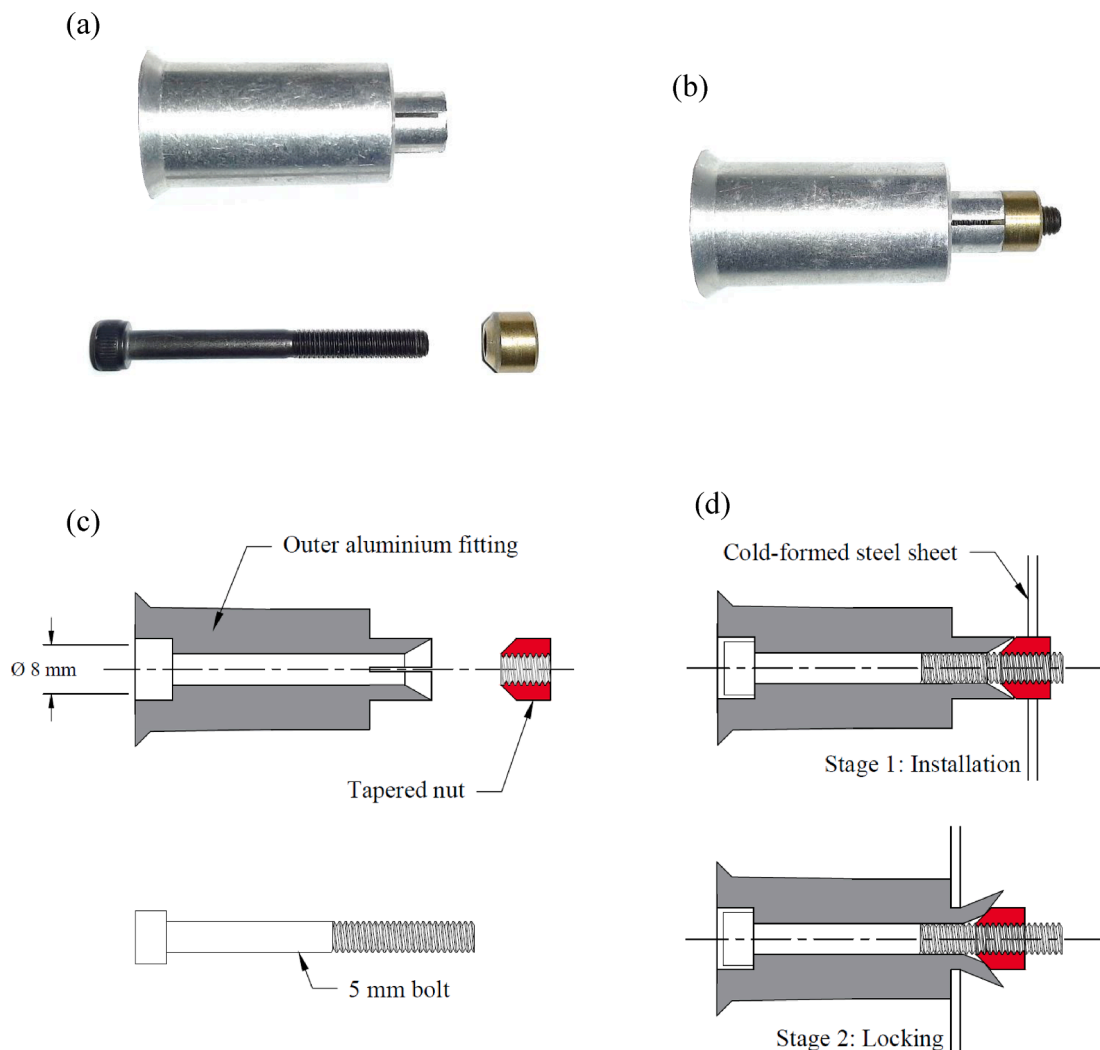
Type 4 connector: (a) Dismantled, (b) Assembled, (c) Cross-sectional details, (d) Assembly detail.
